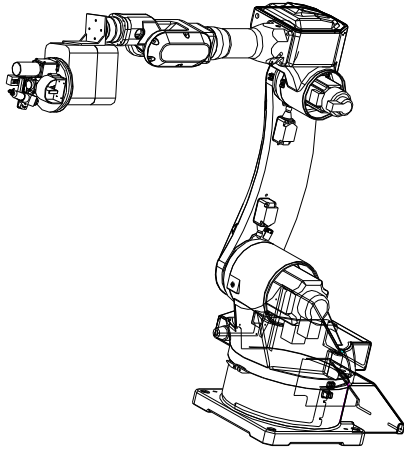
Structure of tube sheet automatic welding robot robot system
